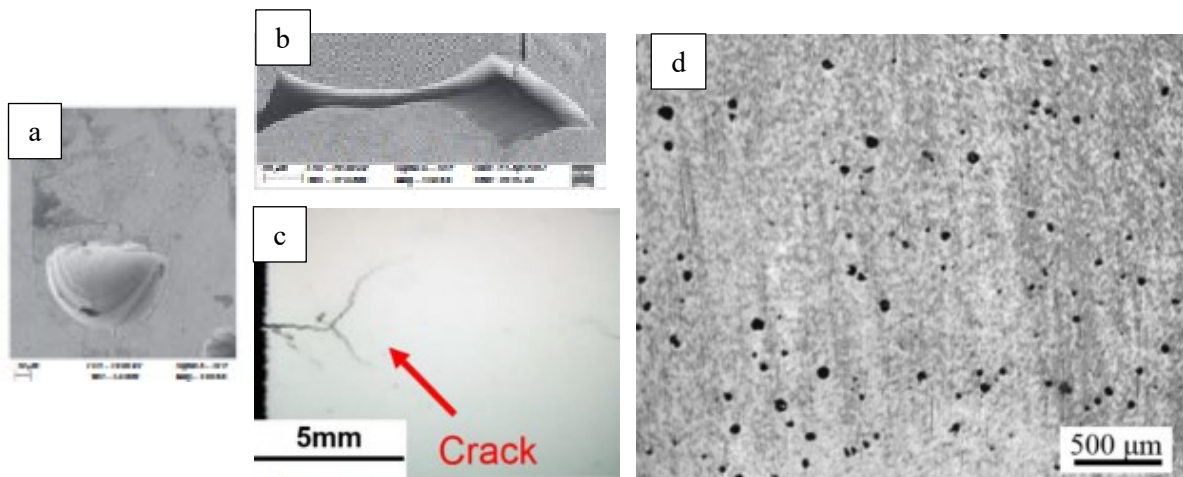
illustrative examples of SLM typical defects. a) Keyhole porosity b) Lack of fusion c) Cracks d) Gas porosities.
